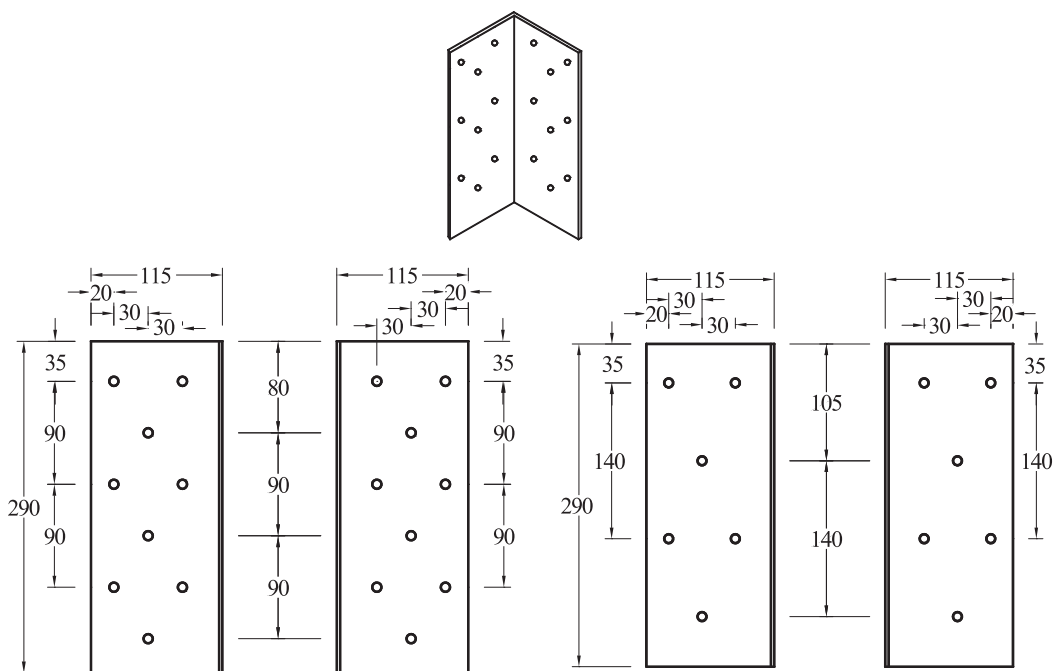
Design of L-type aluminum alloy connectors with 18 (left) and 12 (right) 8-mm self-tapping screws (units: mm).
